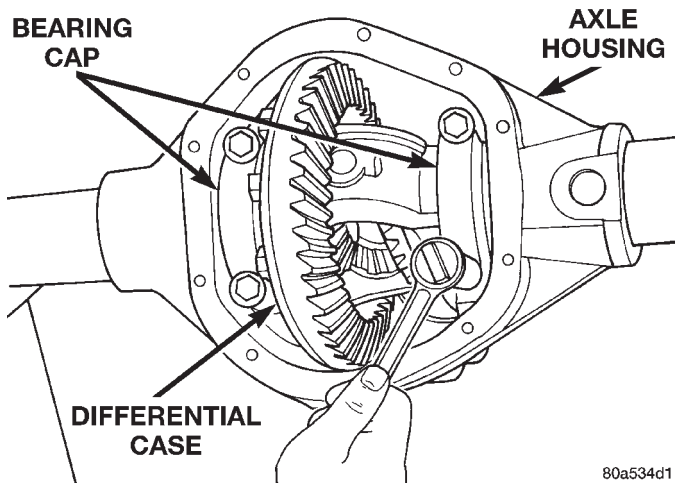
Tighten Bolts Holding Bearing Caps—Typical
